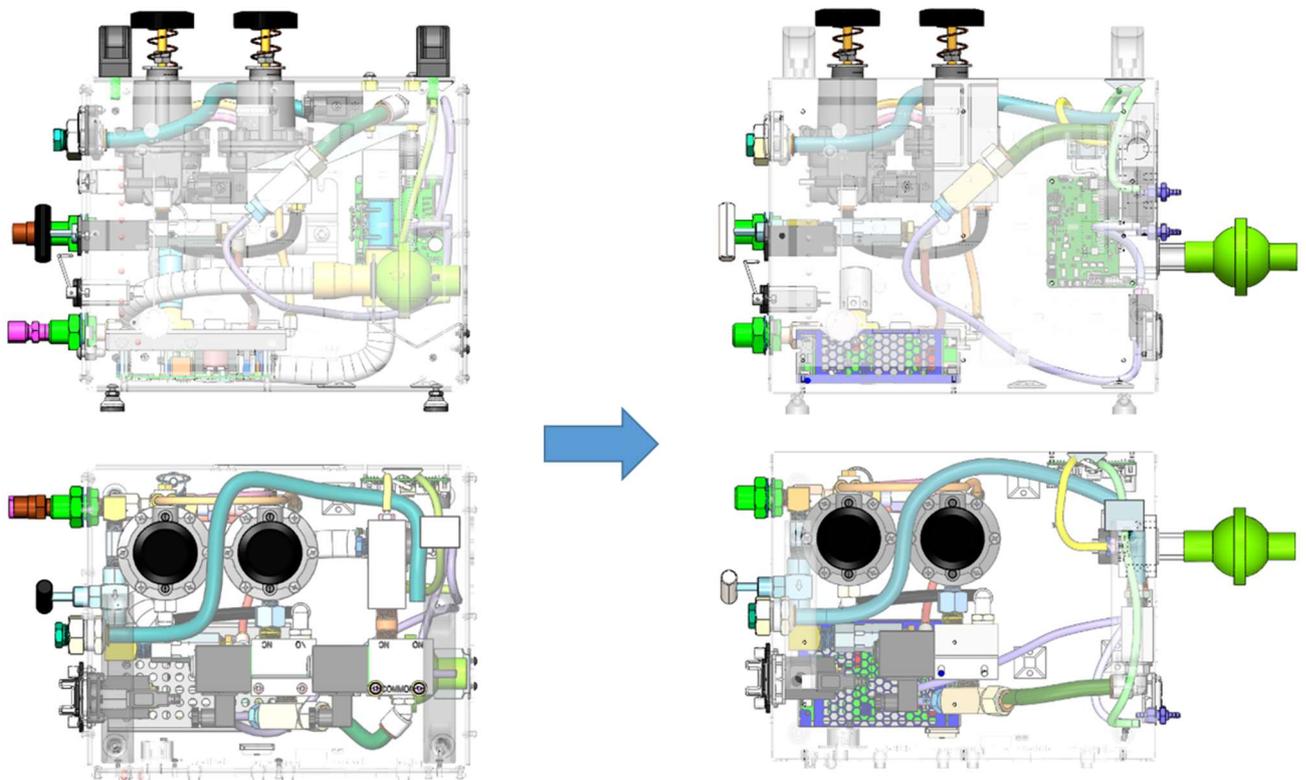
CAD view of the most impacted elements in the design: Left: original design; Right: local design.
